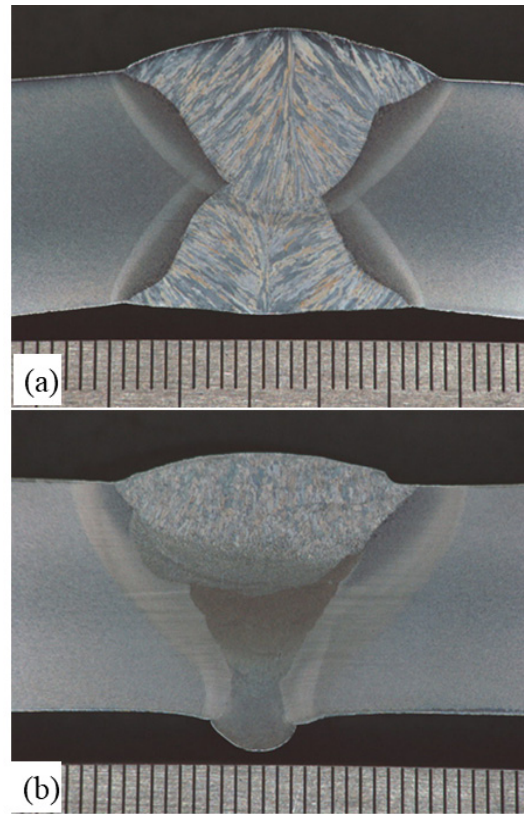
Cross-sectional optical microscopy image of (a) longitudinal weld (SAW) and (b) girth weld (GTAW+SMAW)
